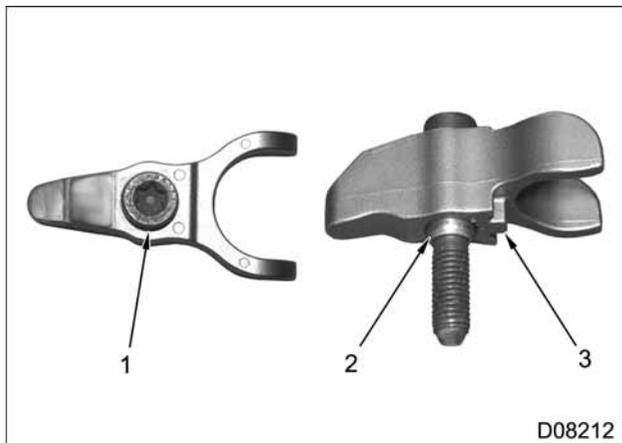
Fuel injector hold down clamp assembly (2006 cylinder head application)
